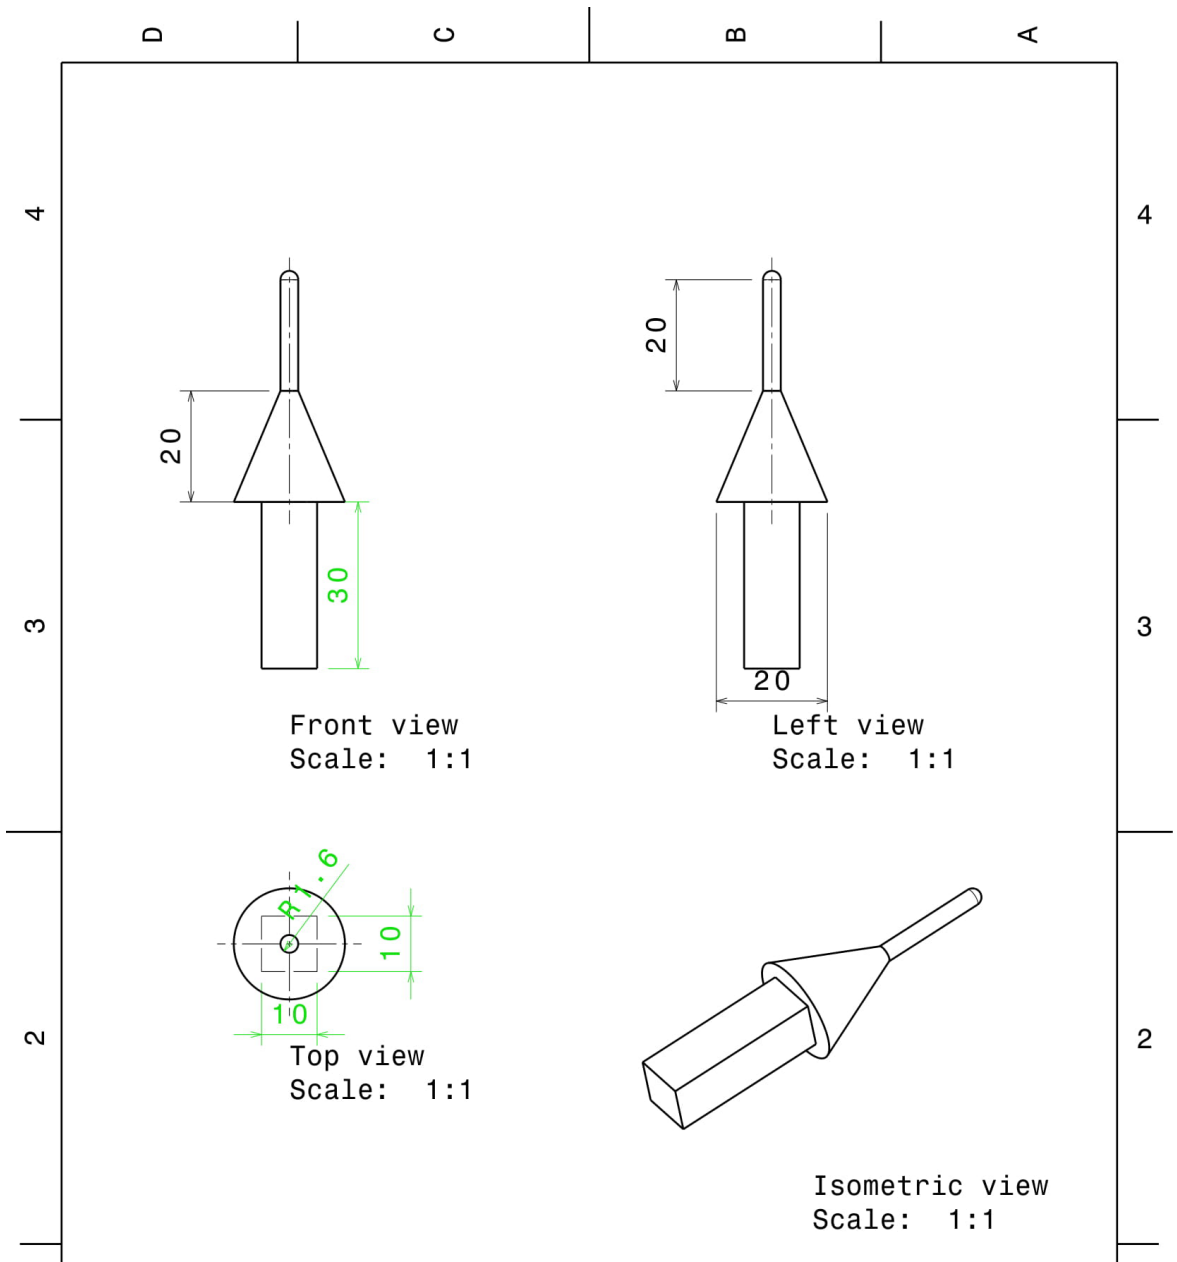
Drawing sheet for punch head of 6.4 mm diameter.
